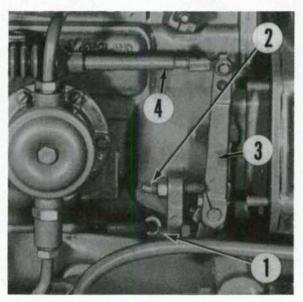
View of throttle linkage showing low idle and high idle speed adjusting screws.
